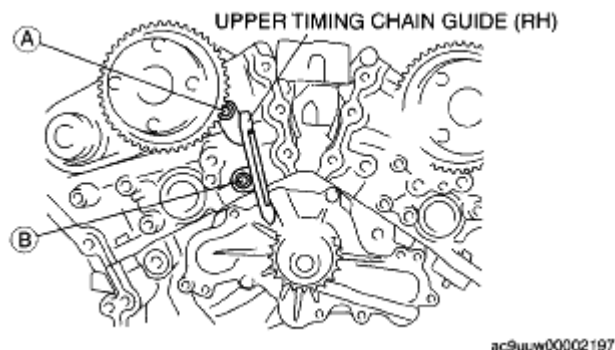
Identifying Upper Timing Chain Guide And Bolts
